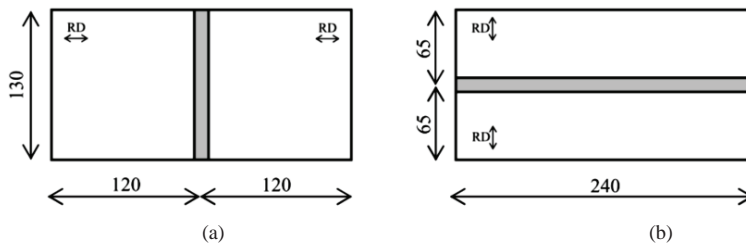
Friction stir welded sheet assemblies with different welding line orientations: (a) transversal and (b) longitudinal.
